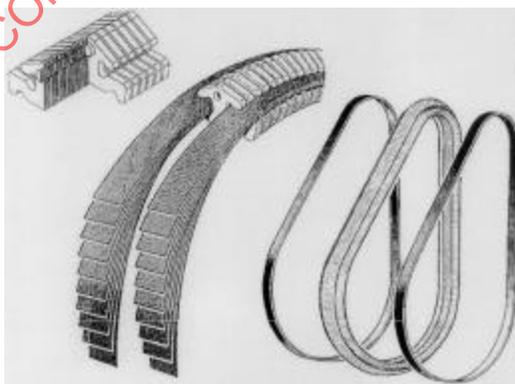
COMPRESSION BELT CONSTRUCTION (VAN DOORNE TYPE)
